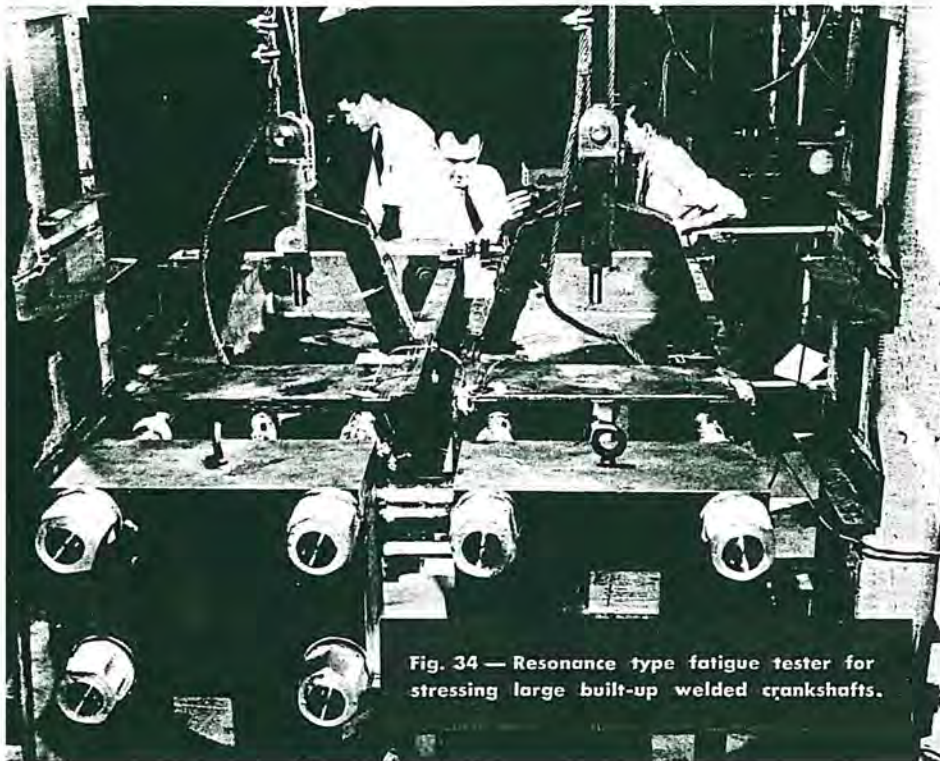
Resonance type fatigue tester for stressing large built-up welded crankshafts.
